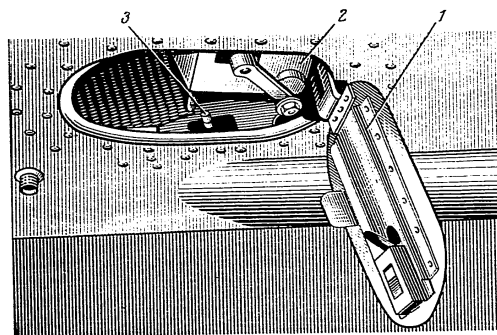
THIRD GROUP TANK FUEL CUT-OFF VALVE
